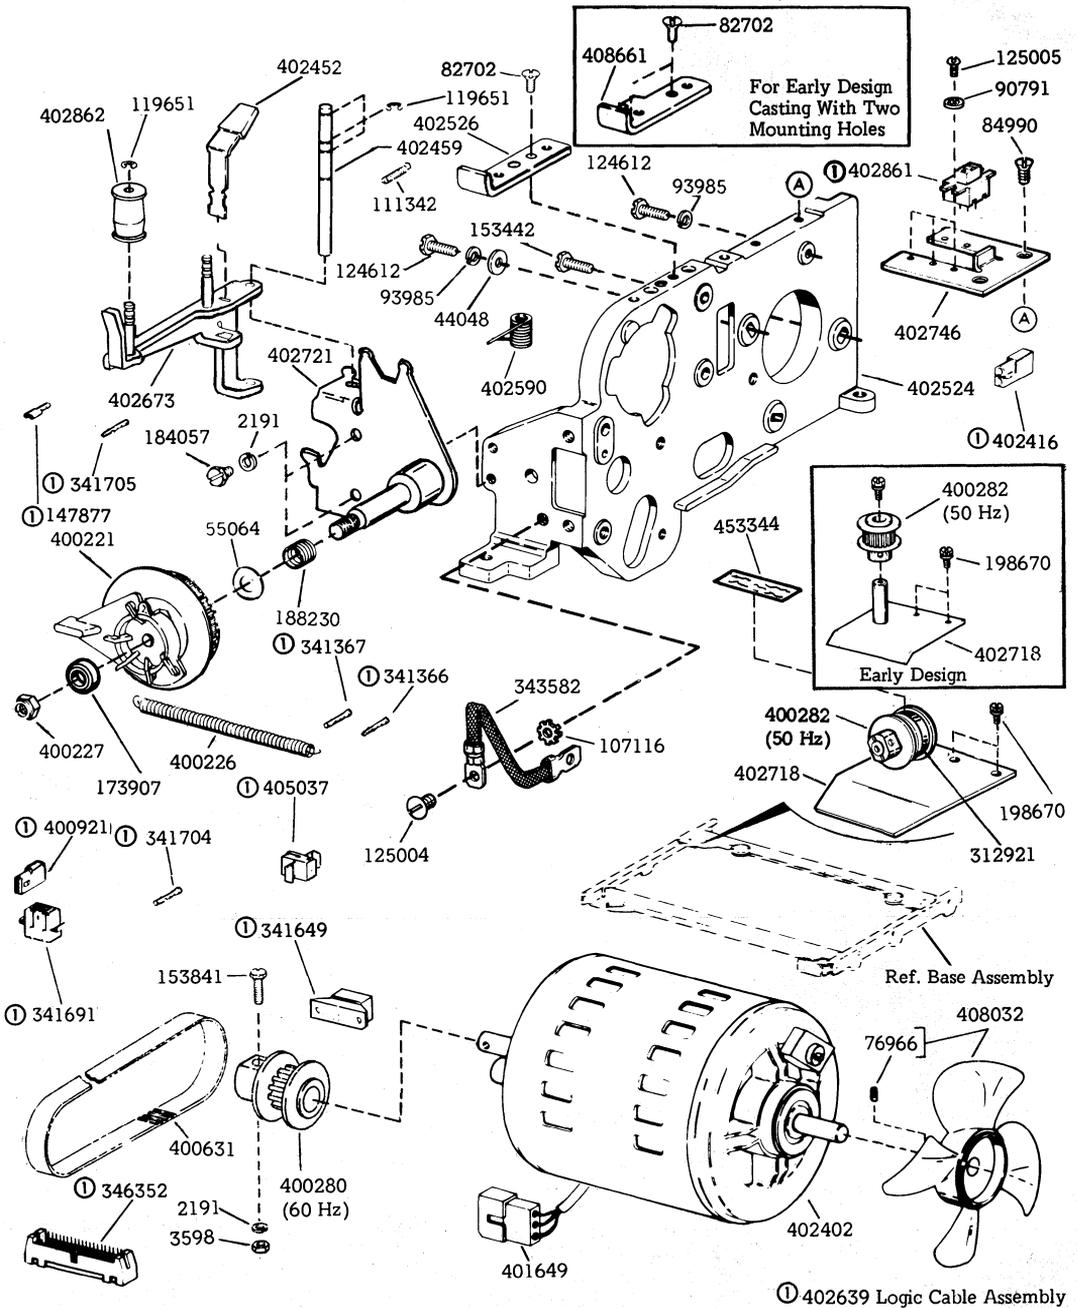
Left Casting Assembly and 402402 Motor (Tractor Feed - 132-Column)
